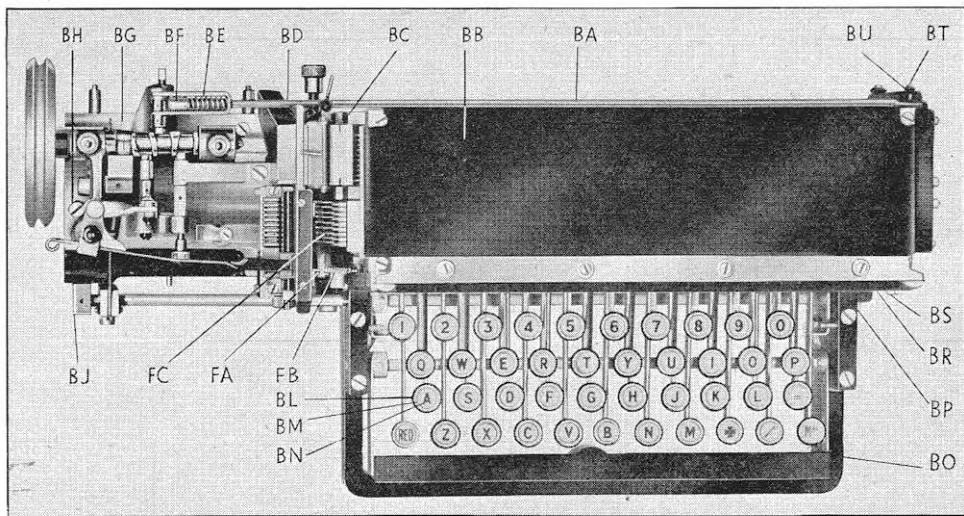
PERFORATOR SUB-ASSEMBLY 860/200B
